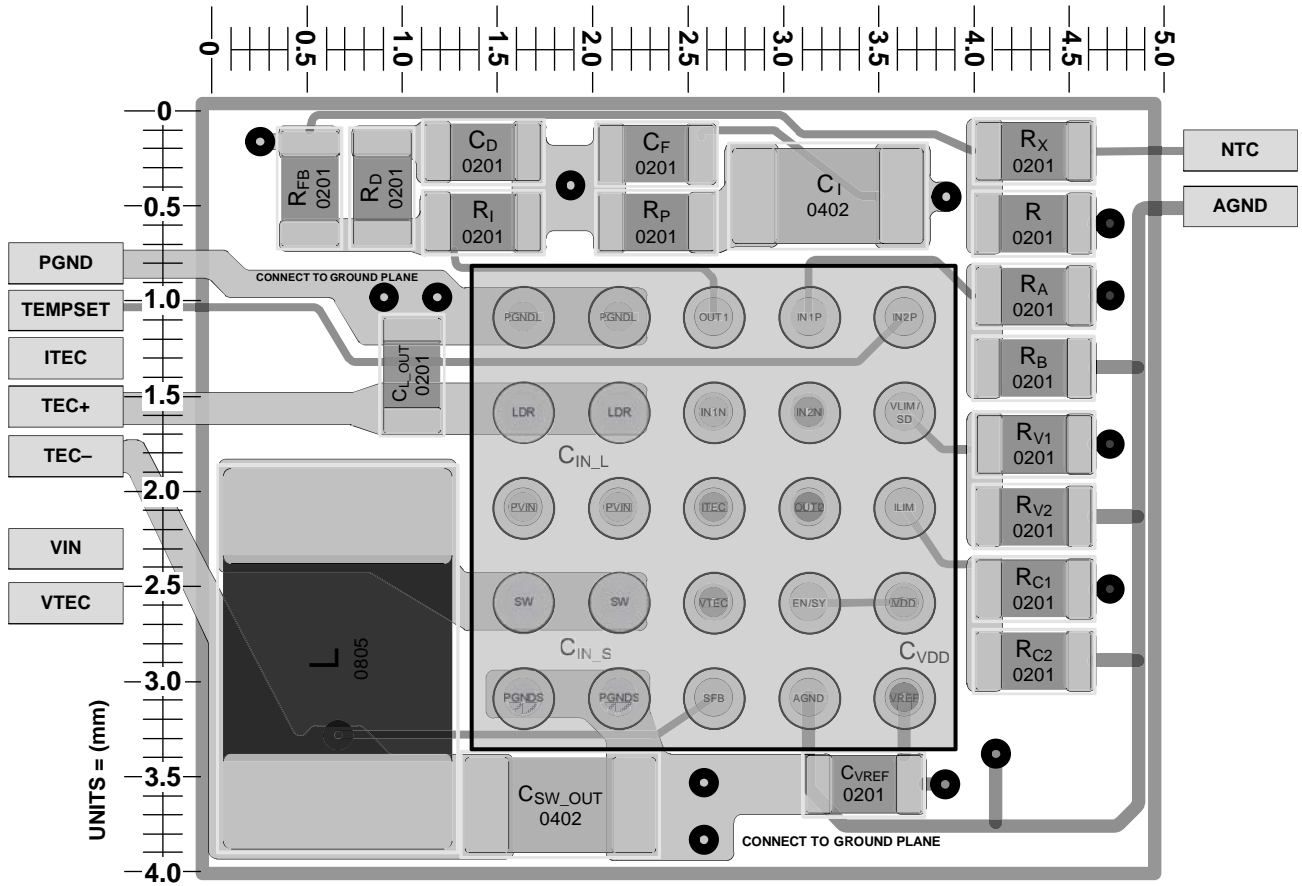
Example PCB Layout Using Two Layers (Top Layer Only)
